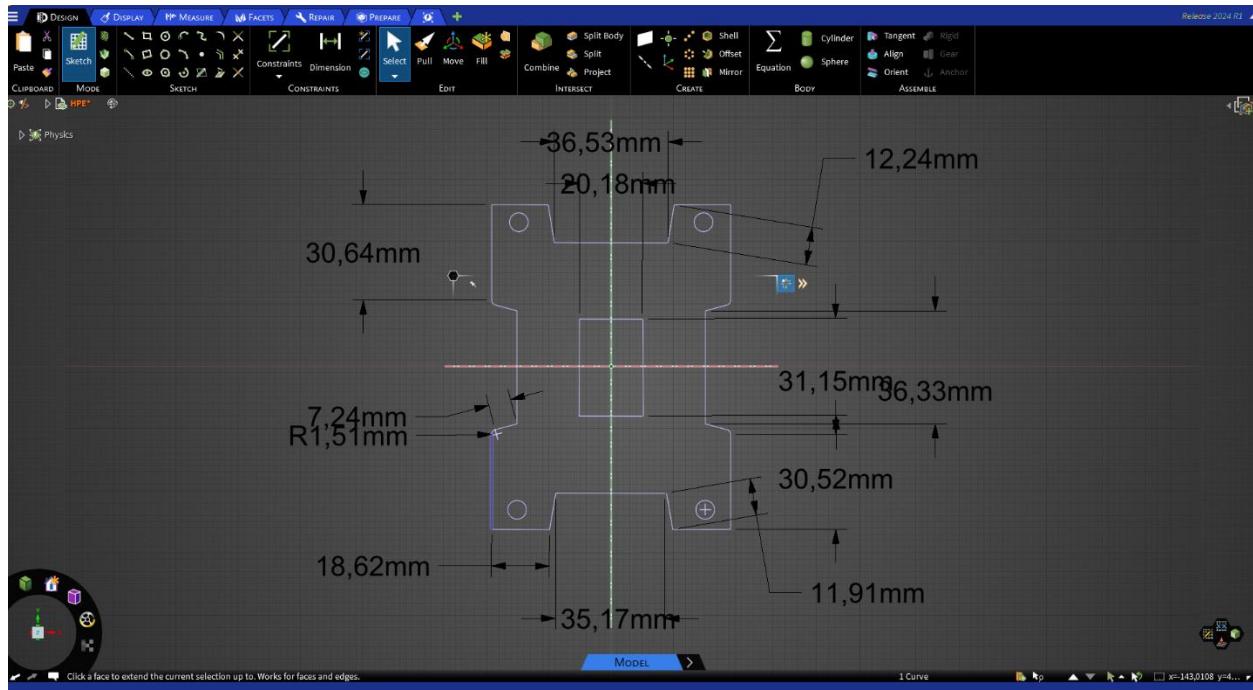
SP3 Socket stiffener frame detailed dimensional specifications
